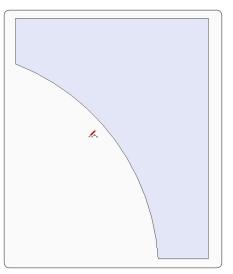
Begin making the frame with a two-dimensional drawing of its profile.
